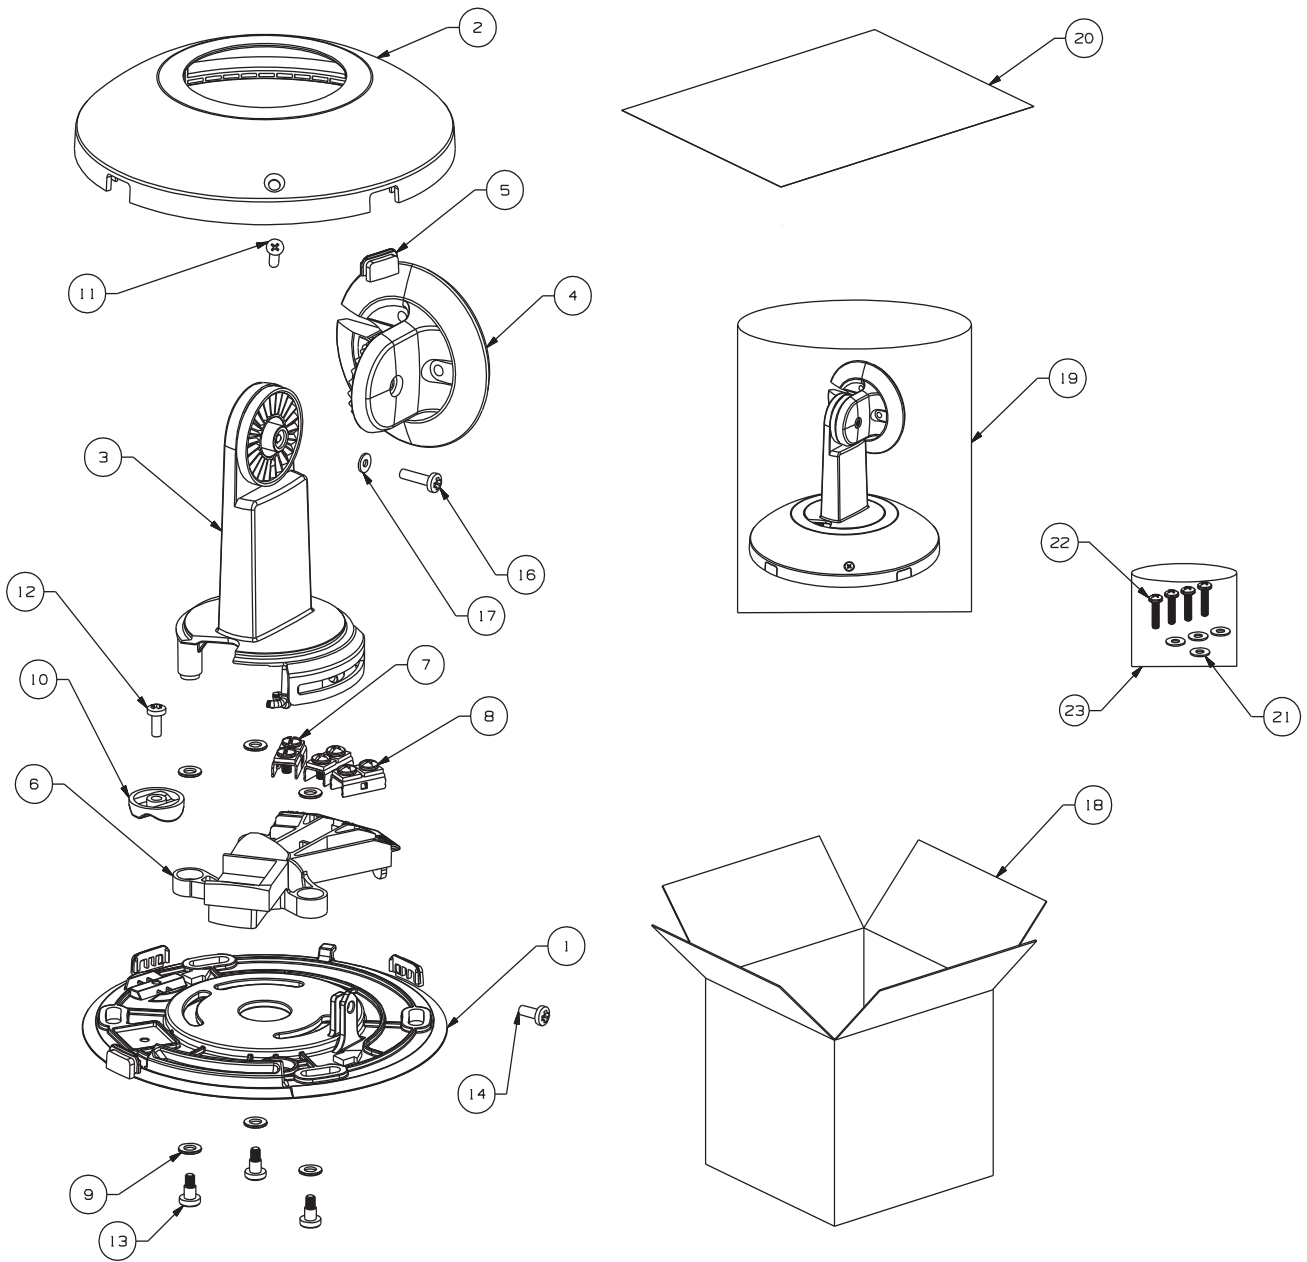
DS 100SE Ceiling-Mount Bracket Exploded View
